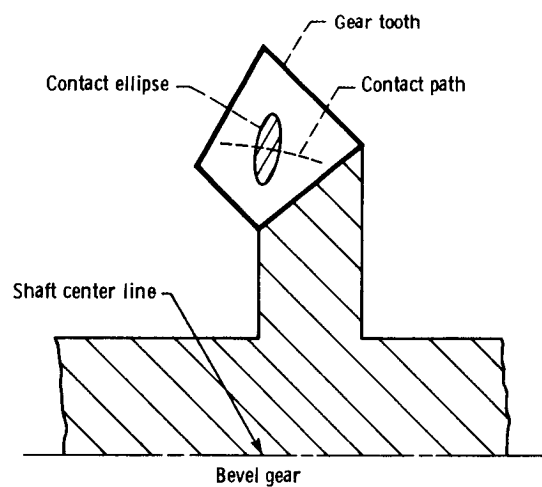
Contact ellipse moves across the face of the gear tooth as the gear meshes with its mating gear (not shown).
